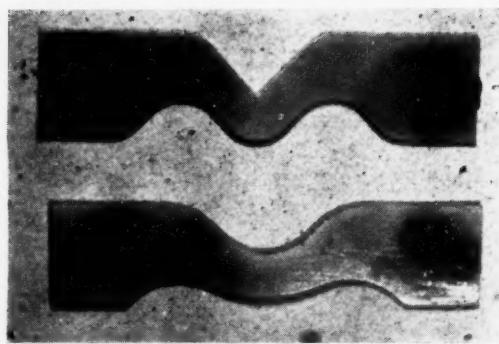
Tear Test Specimens—Modified Graves (Top); Winkelmann "B" (Bottom)
